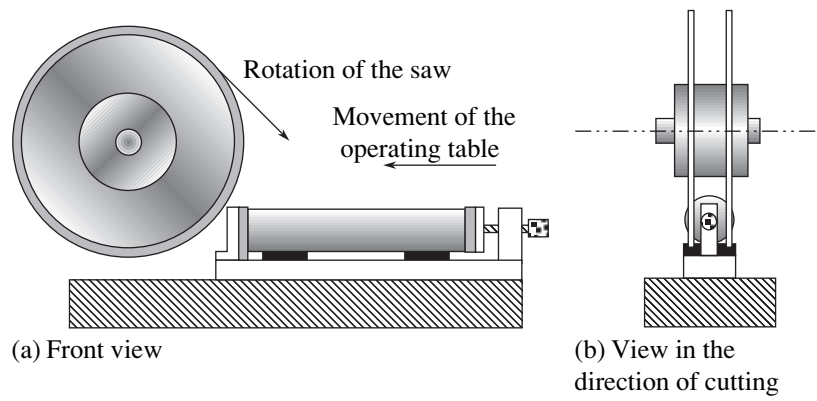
Schematic diagram of the cutting of lateral crystal sides: (a) the front view and (b) the view in the direction of cutting.
